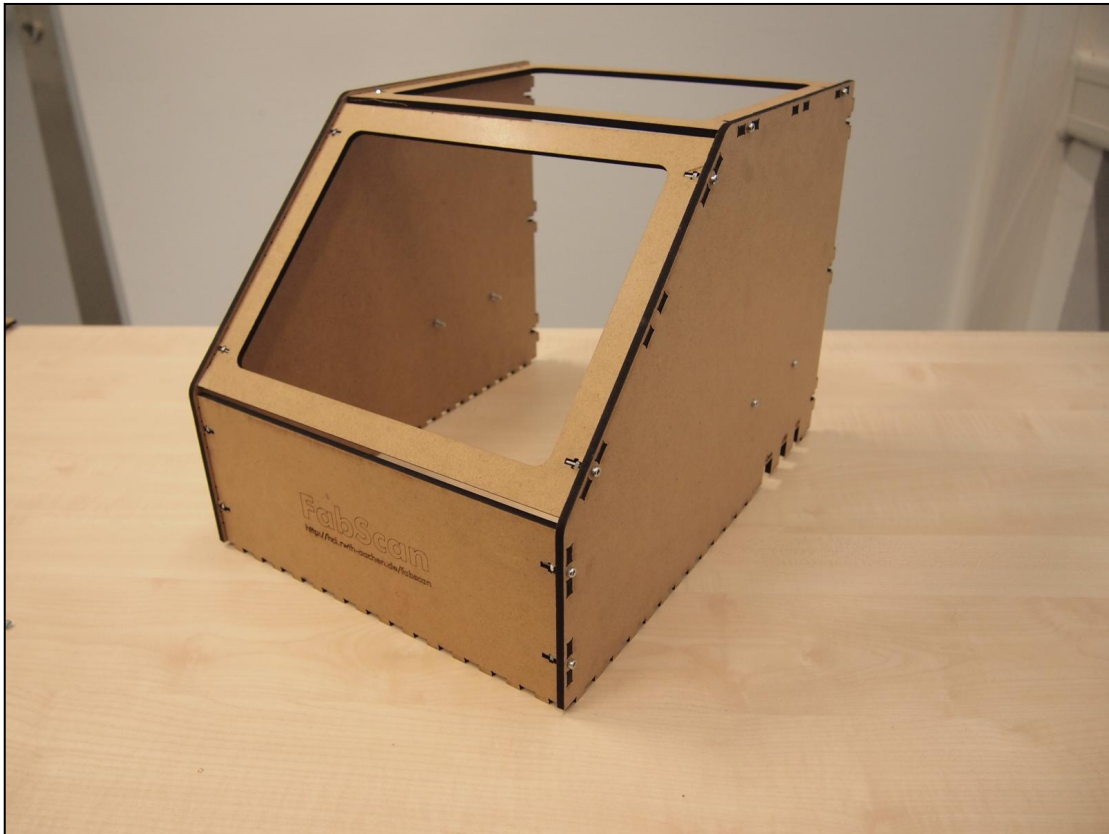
Use 12 DIN 912 M3x16 screws and nuts to secure the housing.
